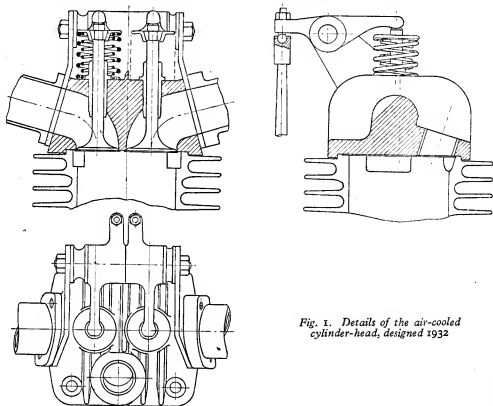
Details of the air-cooled cylinder-head, designed 1932
